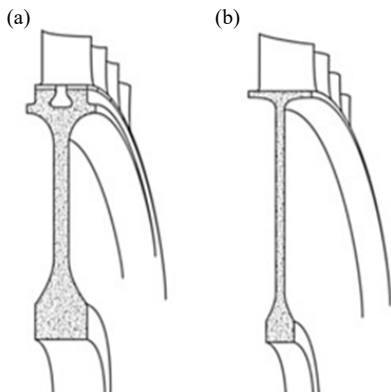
(a) A conventional bladed disk assembly and (b) a linear friction welded blisk [56]. Reprinted from *Acta Mater.*, 59, R. Turner, J.C. Gebelin, R.M. Ward, and R.C. Reed, Linear friction welding of Ti–6Al–4V: modeling and validation, 3792–3803, Copyright 2011, with permission from Elsevier.
